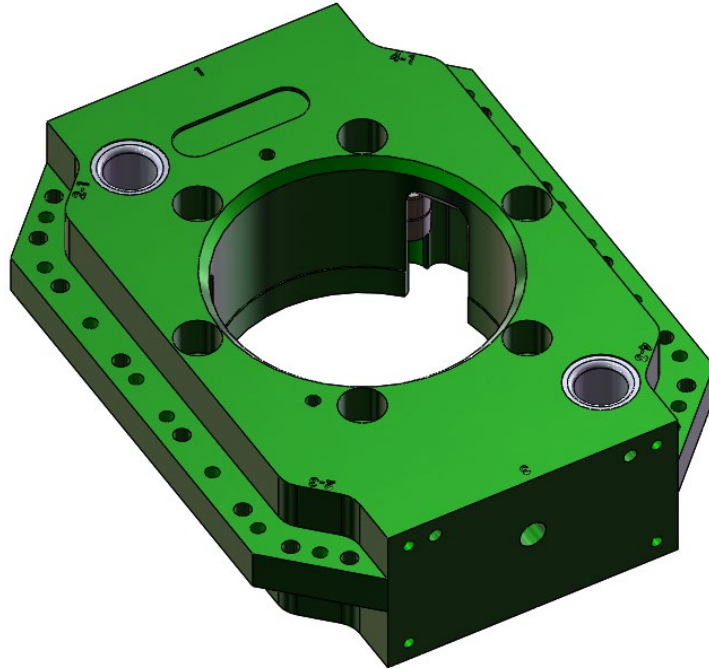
E125 Tool Side Visual Inspection
